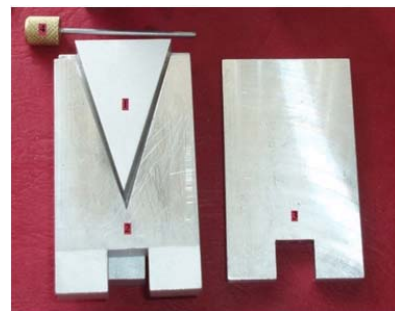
Showing the modified chevron-notched short-bar specimen consisting of parts 1-4
